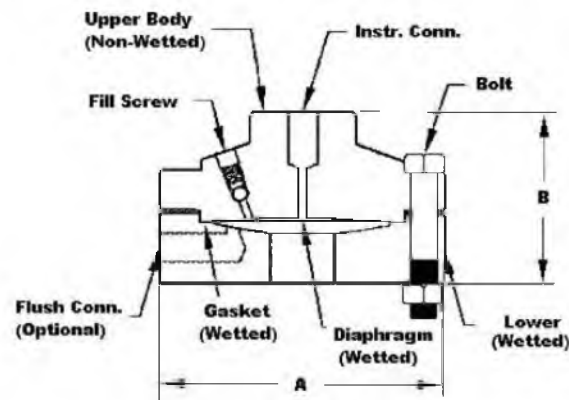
Seal Dimensions (Threaded Process Connection Seals)
